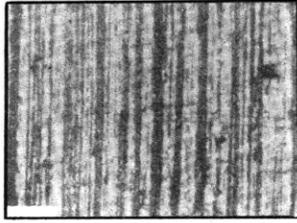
Surface of a Correctly Compressed Lens Ring with Sharp Impressions of Machine Scores
